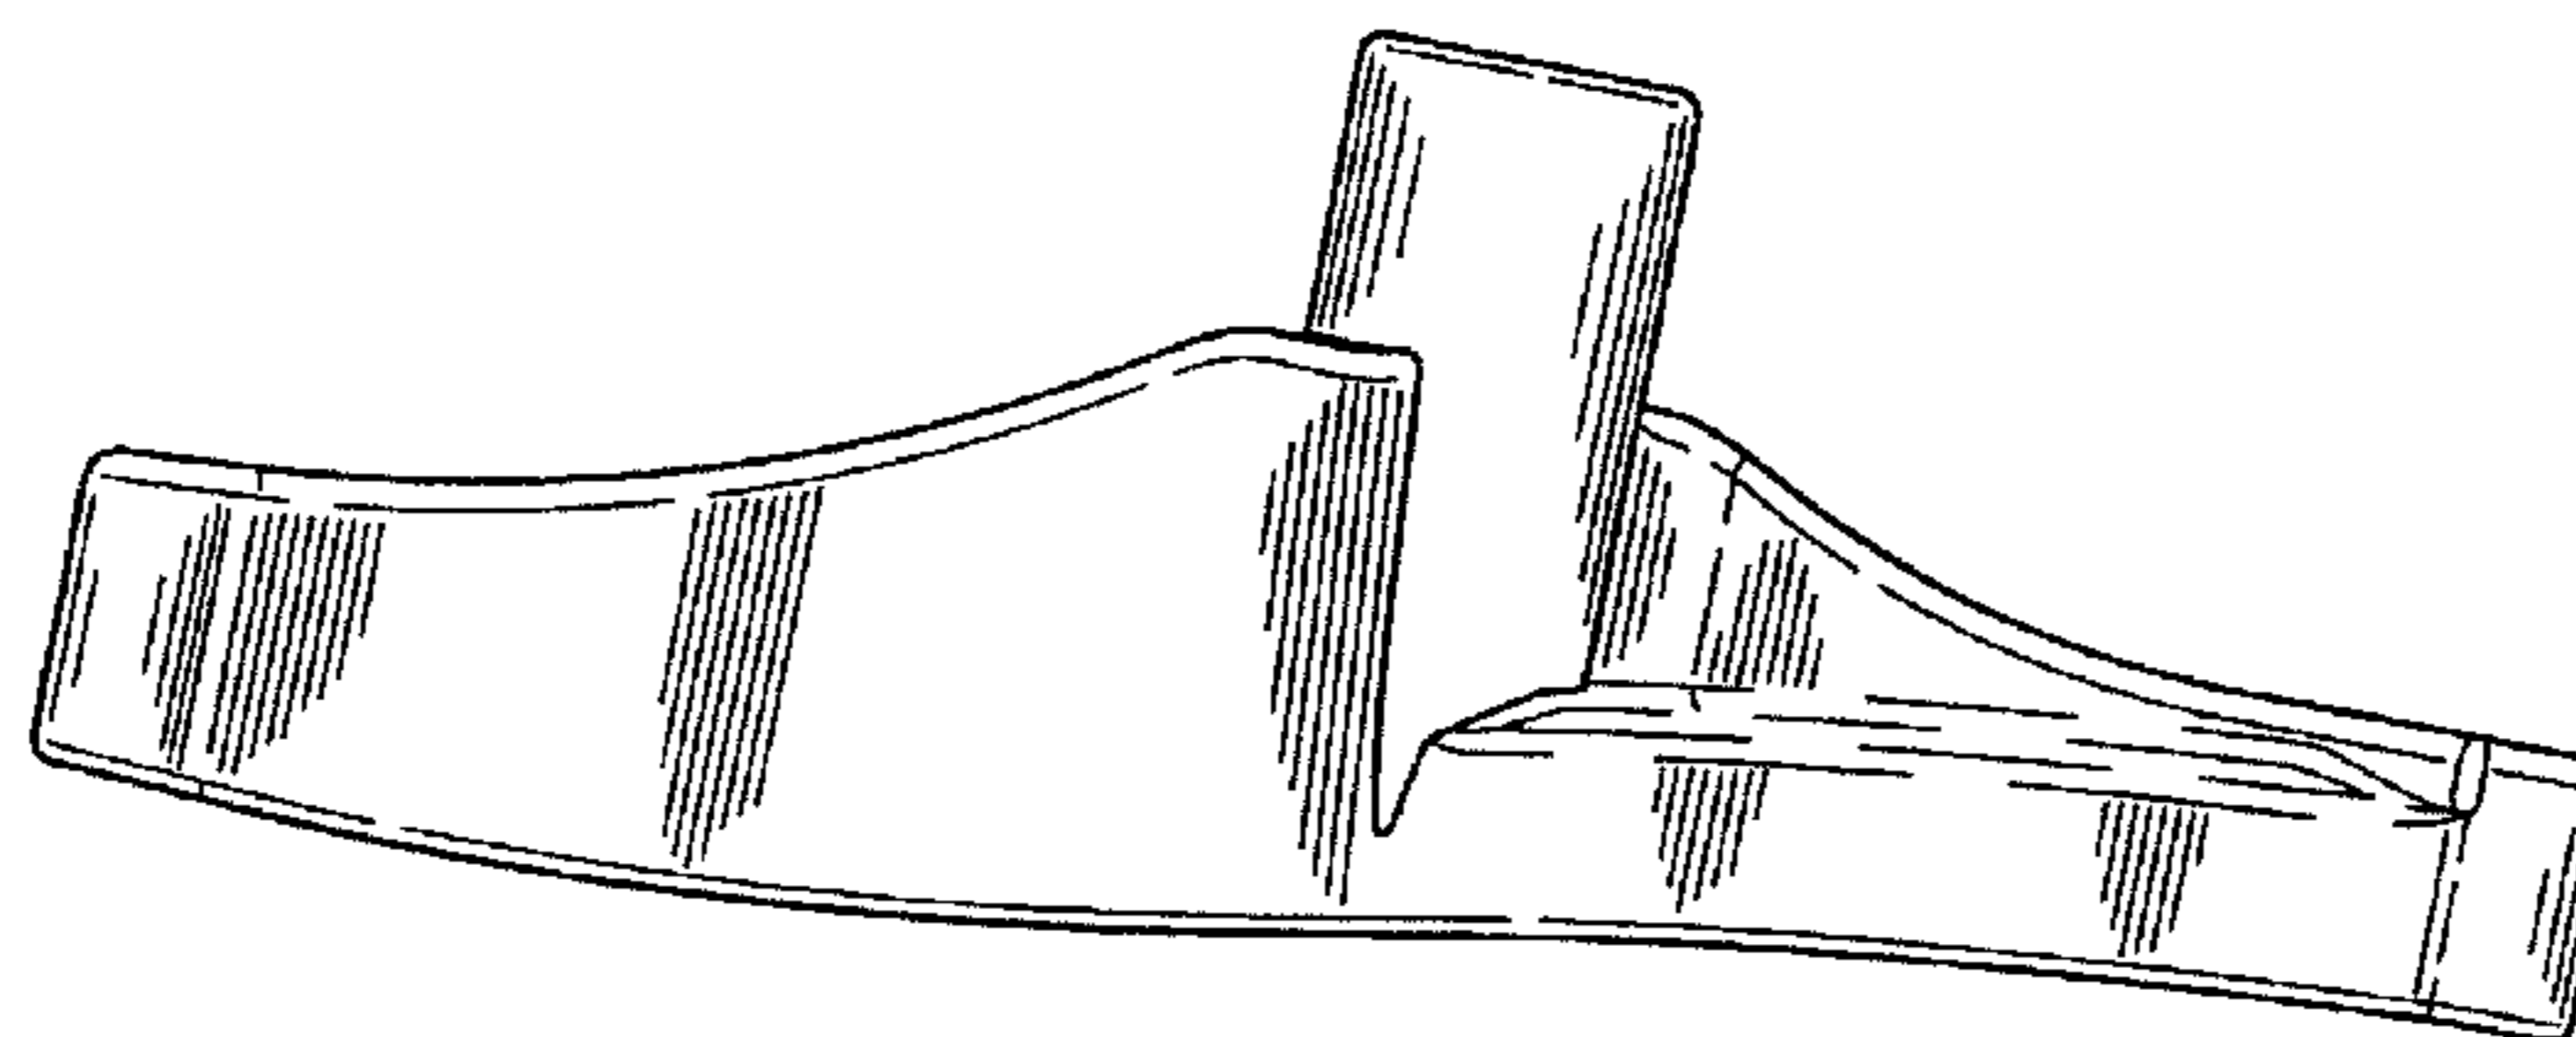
is a right side view of the propeller broom block of FIG. 1;
